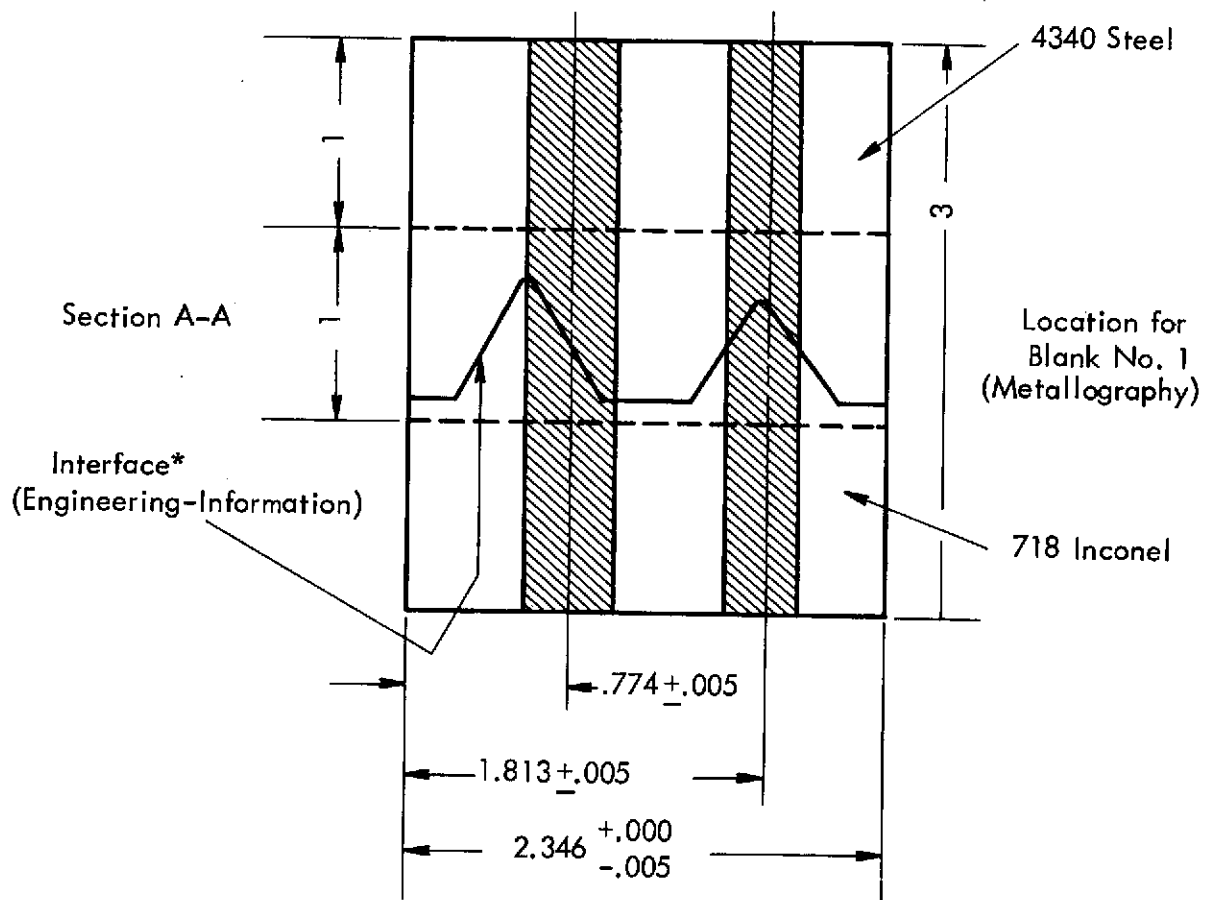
Sketch Showing Location of Tensile and Metallographic Specimen Blanks Within Welded Type II Mismatch Specimen.
